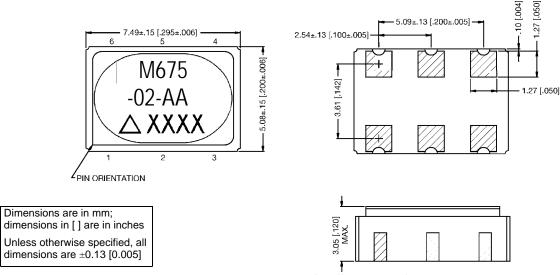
Device Package - 5 x 7.5mm SMT (Surface Mount) Package
